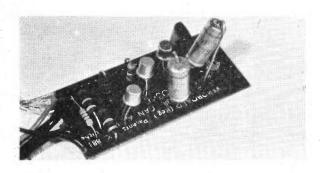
Layout and wiring of the complete unit. Breaks along the copper strips need to be made in front of the fixing hole so that the fixing screw is unable to short adjacent strips in the vicinity.
